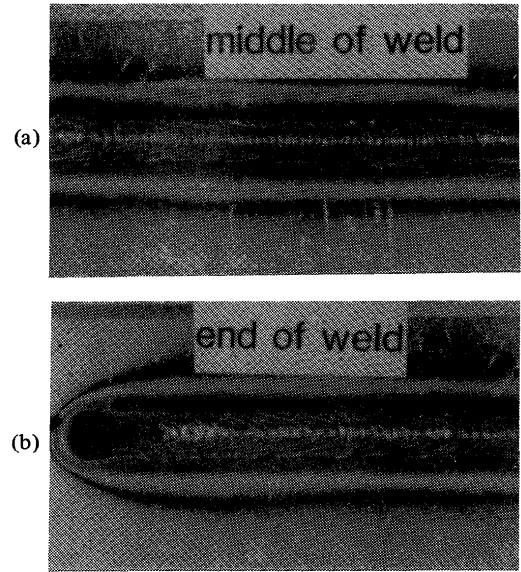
Typical ripple varying in weldment ($V_w = 18$ cm/min., $I_p/I_b = 180/100$ A, $Q_p = 3$ /min) (a) middle (b) end of weld
